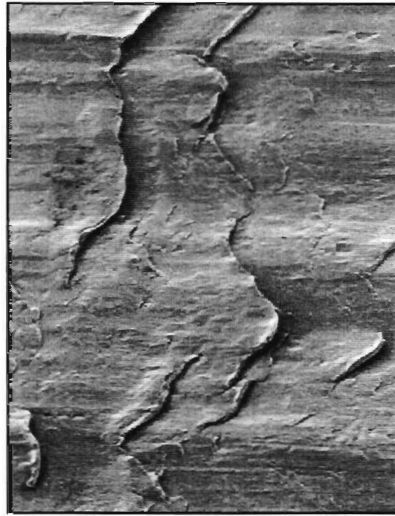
Surface profile of machined 95%Pt-5%HTA.
